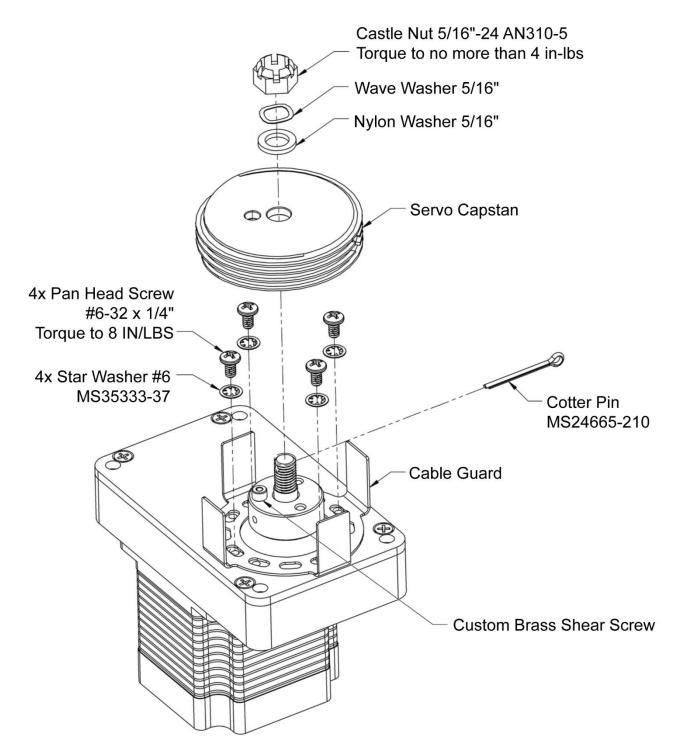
Servo Capstan and Guard – Exploded View (Roll Shown, Pitch Similar)
